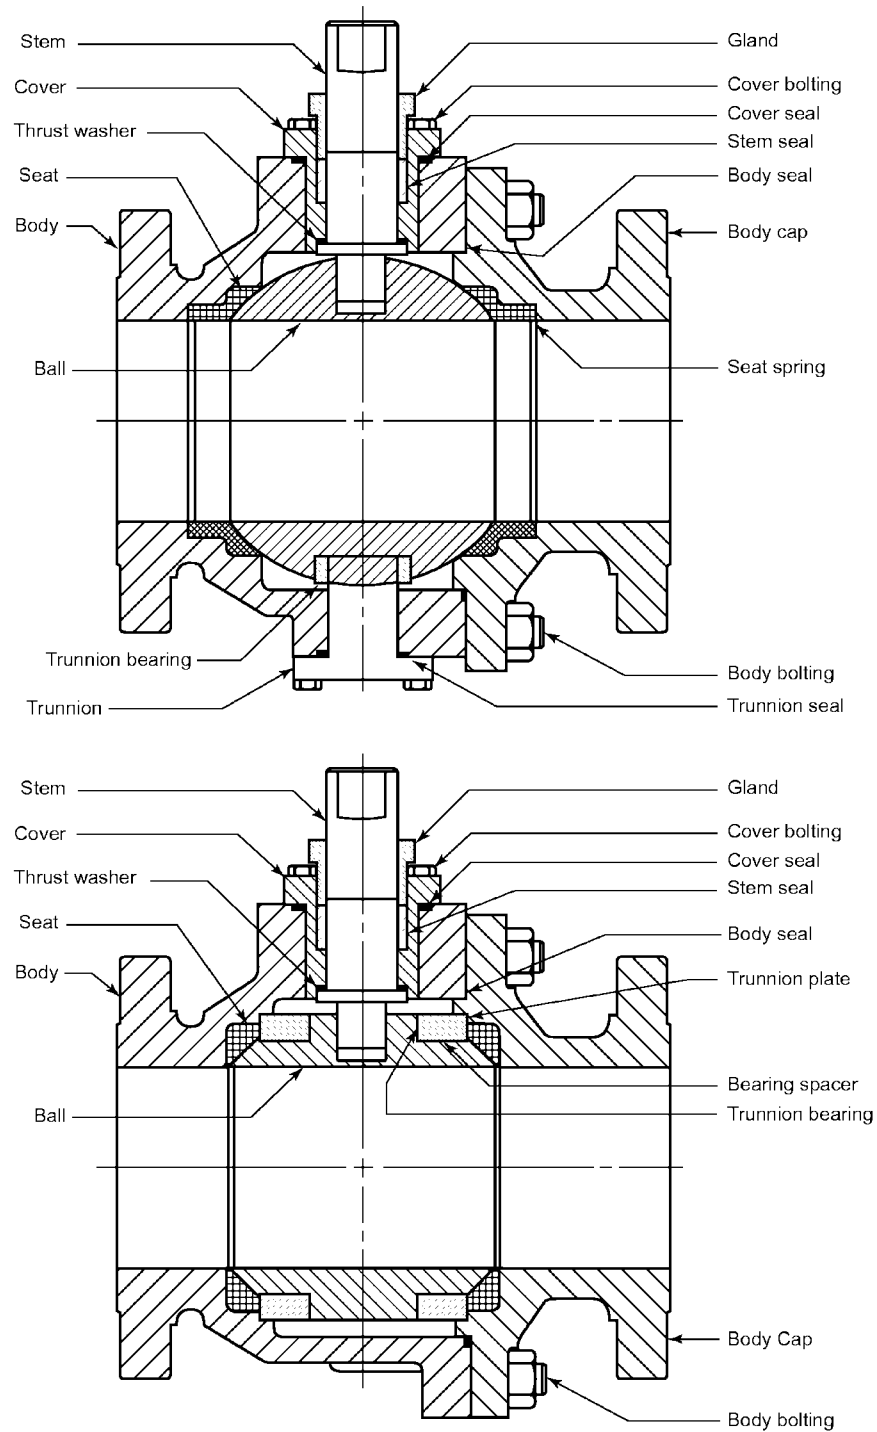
Two Examples of Typical Trunnion-mounted Ball Valve Components
